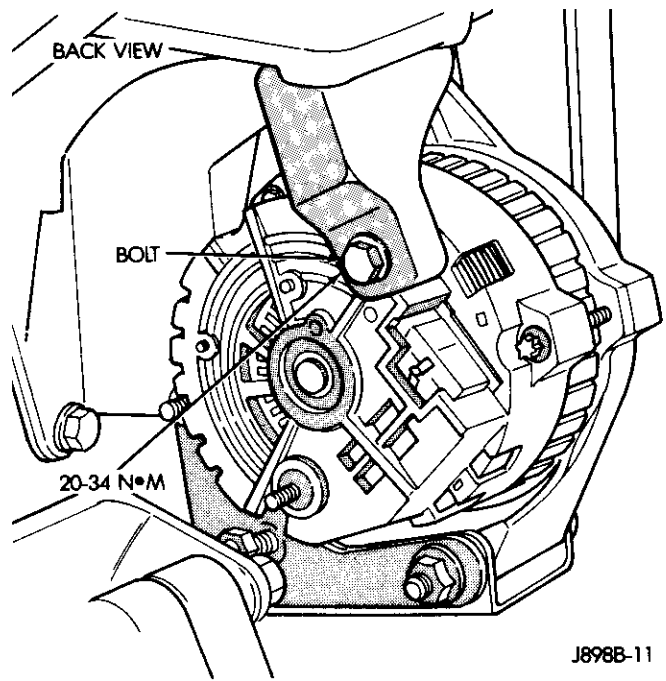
Alternator Removal/Installation - 2.5L w/A/C (Back View)
